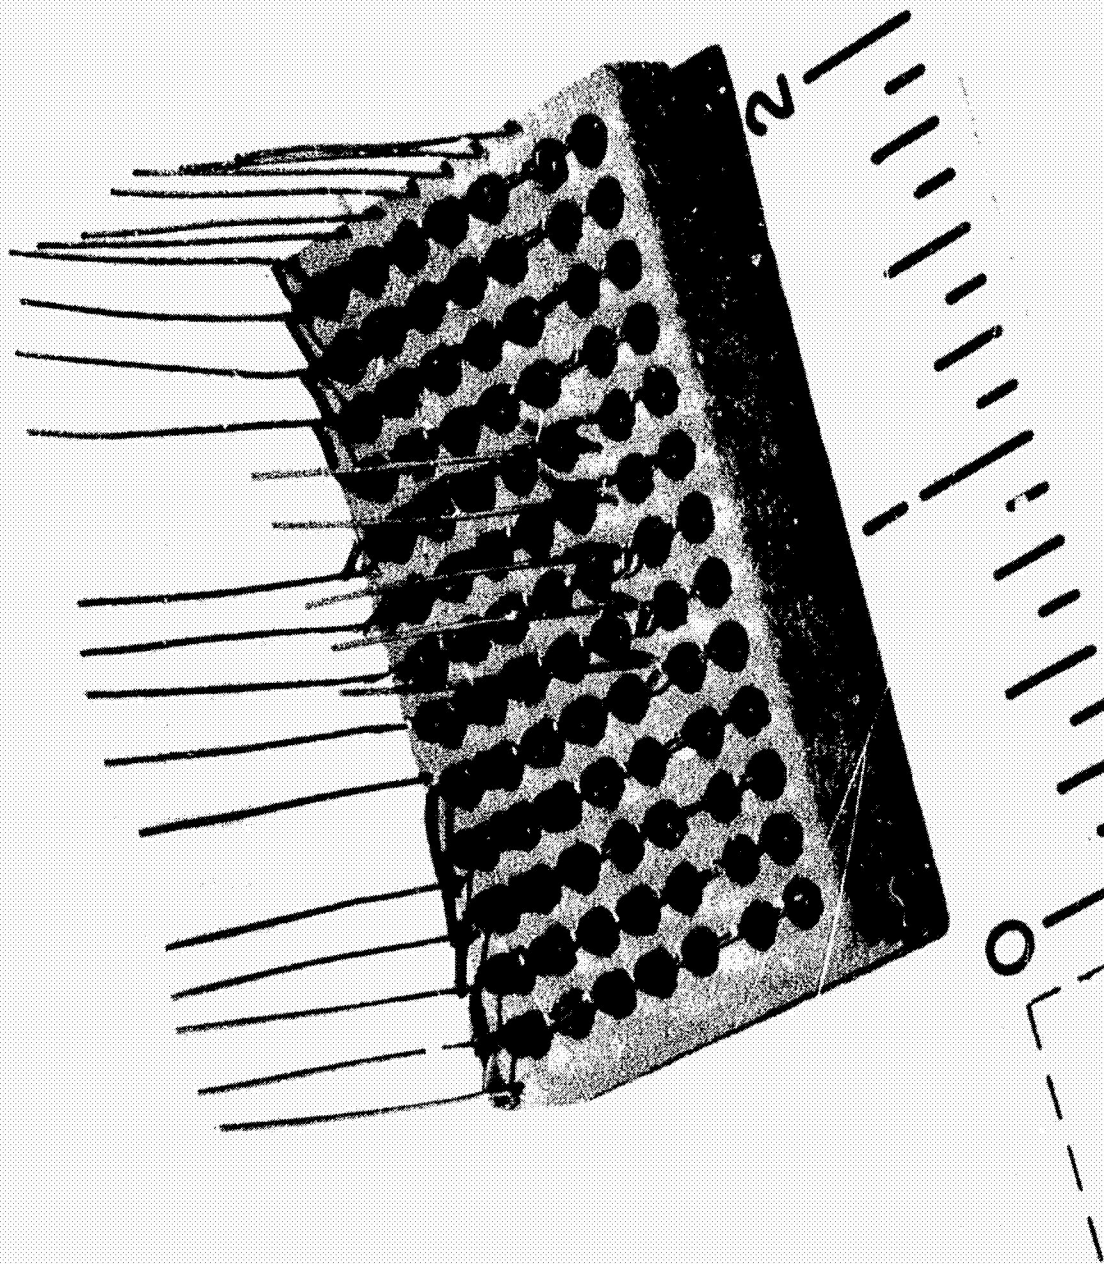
Syntactic foam component holder and welded circuitry.
